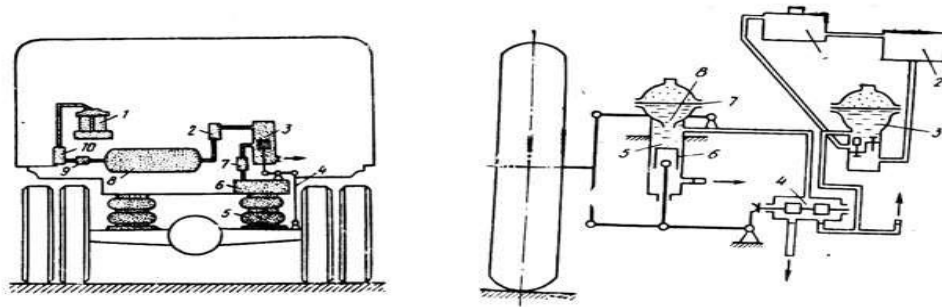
Illustrative drawing of pneumatic and hydropneumatic suspension.
